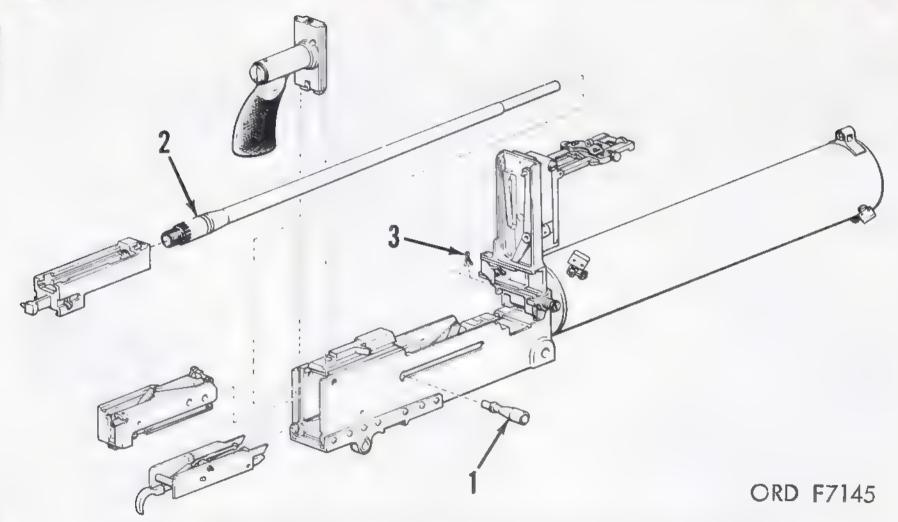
Major groups, assemblies, and component parts for machine gun M1917A1.
